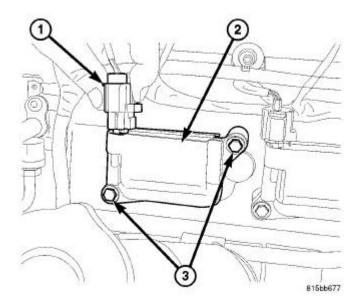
IGNITION COIL MOUNTING BOLTS Courtesy of CHRYSLER LLC
